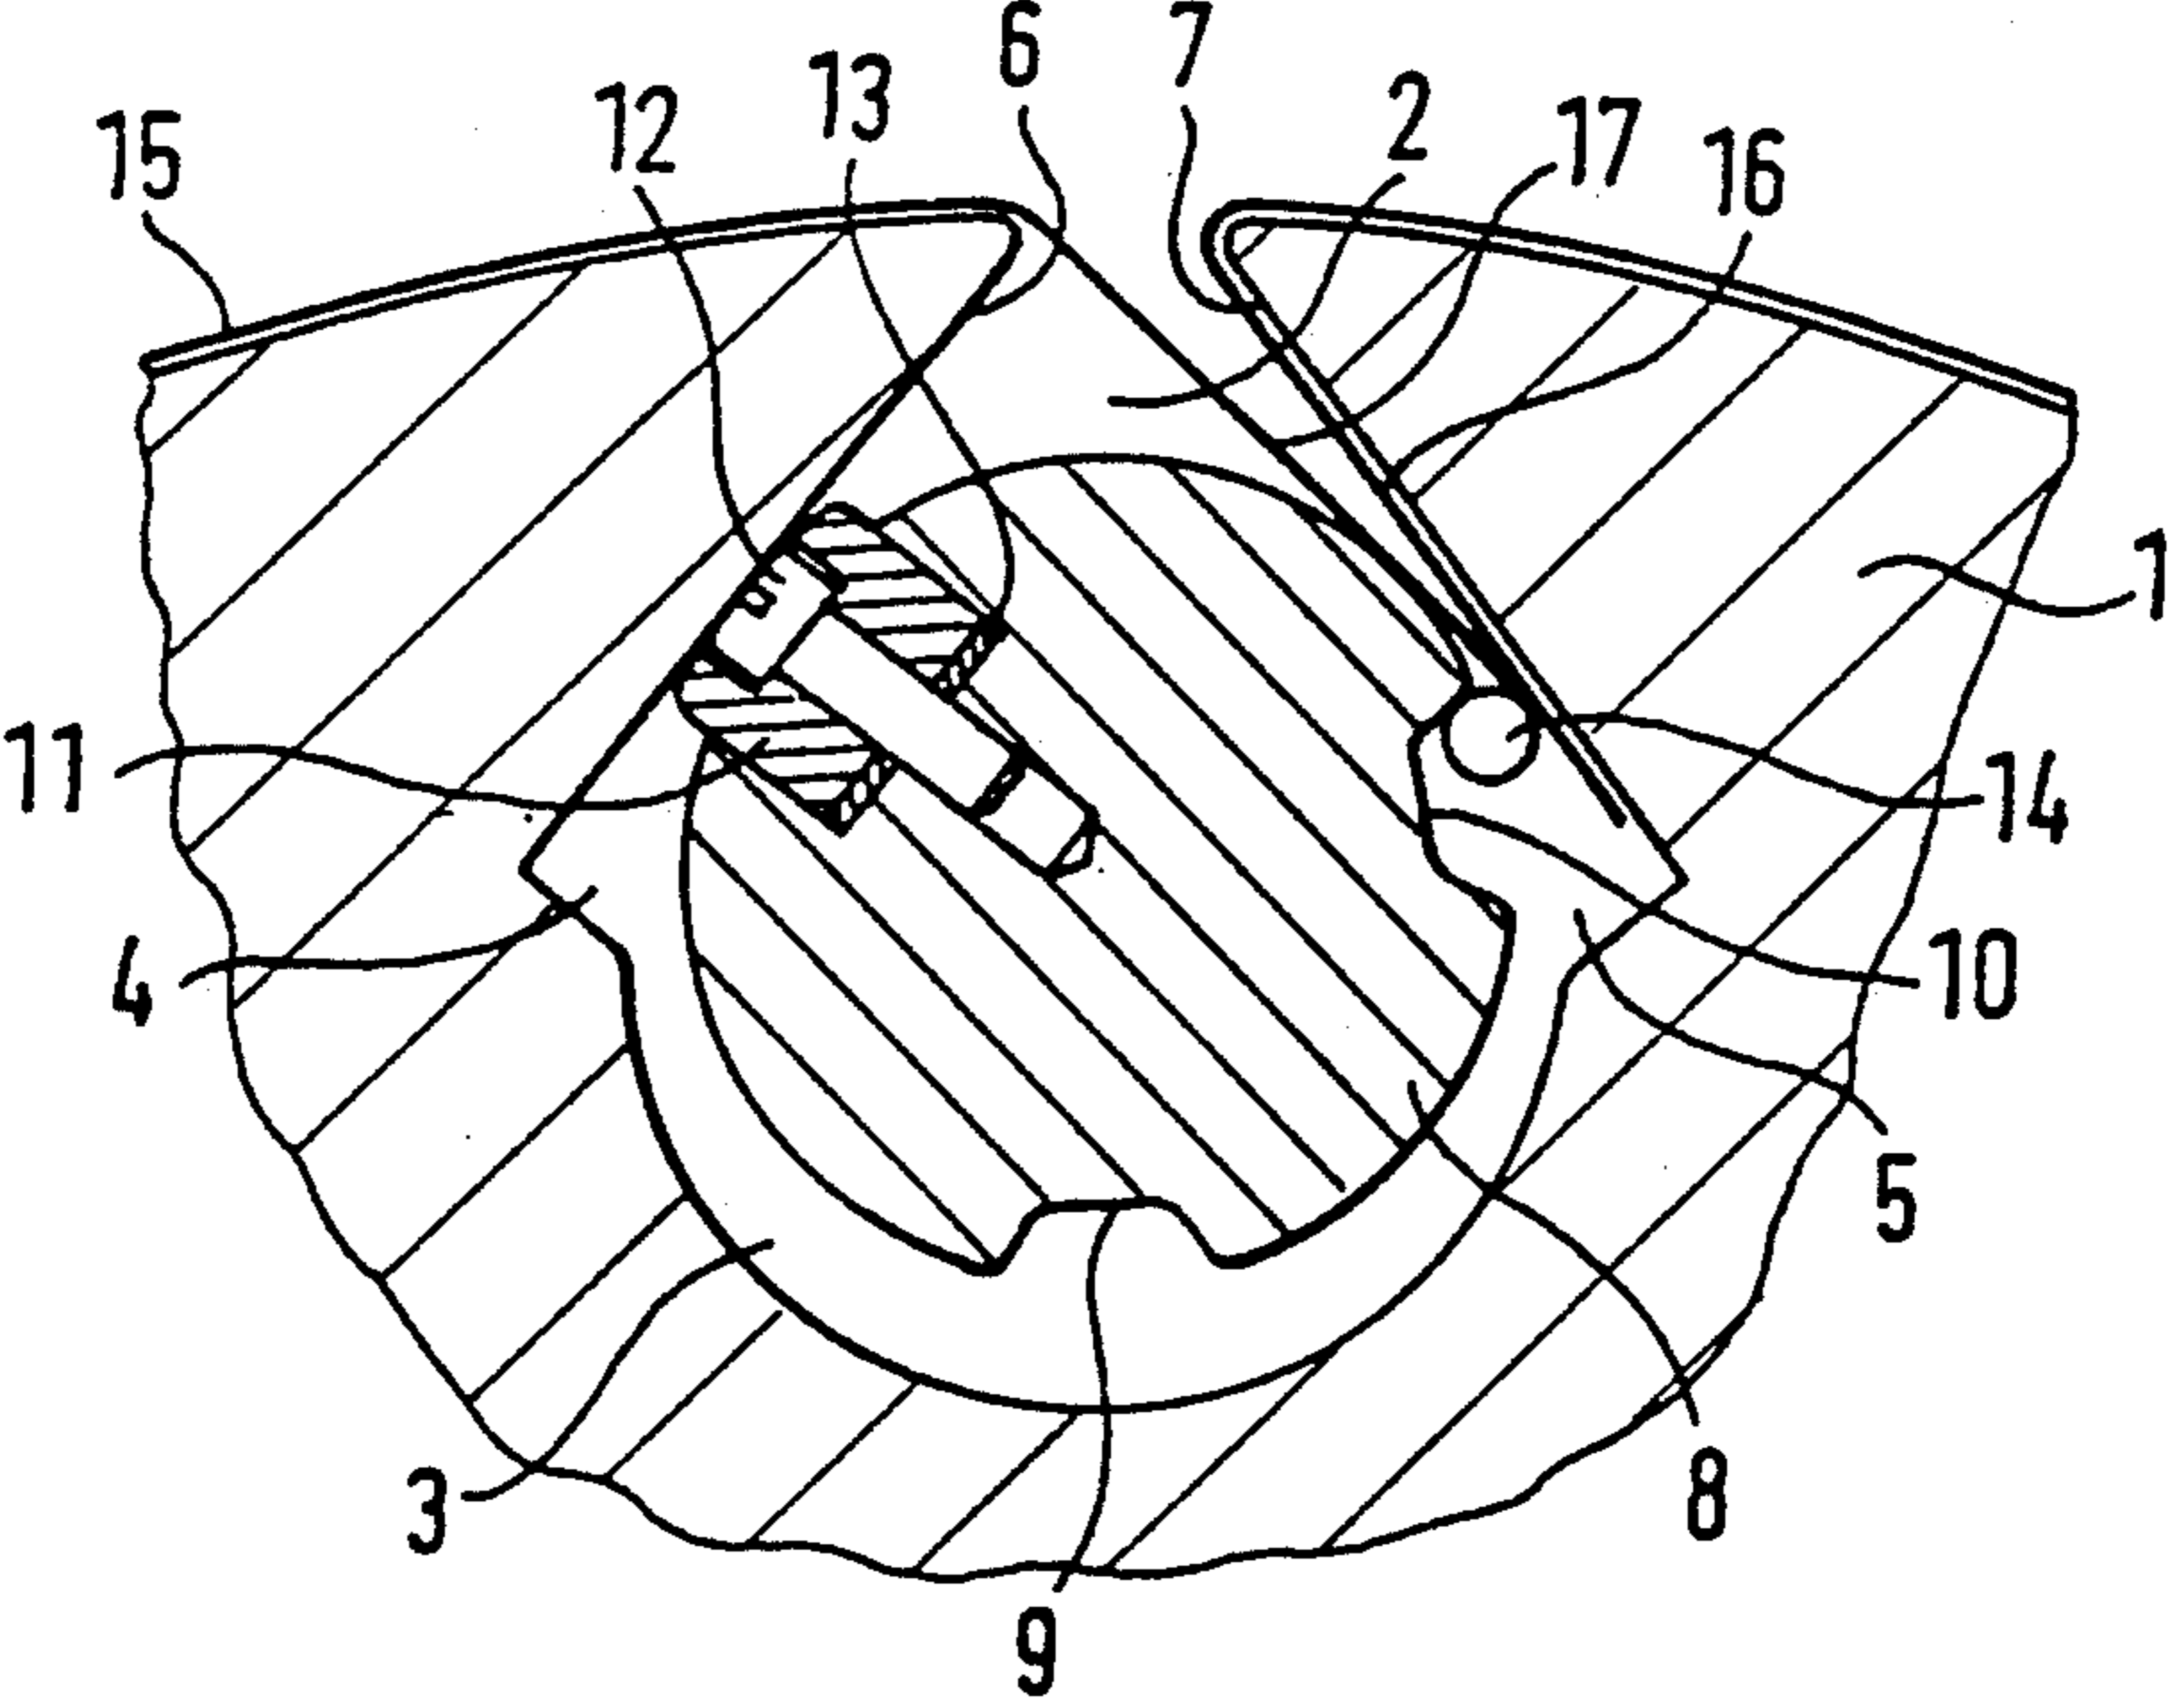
PLATE ATTACHMENT SYSTEM FOR A PRINTING MACHINE FORM CYLINDER
